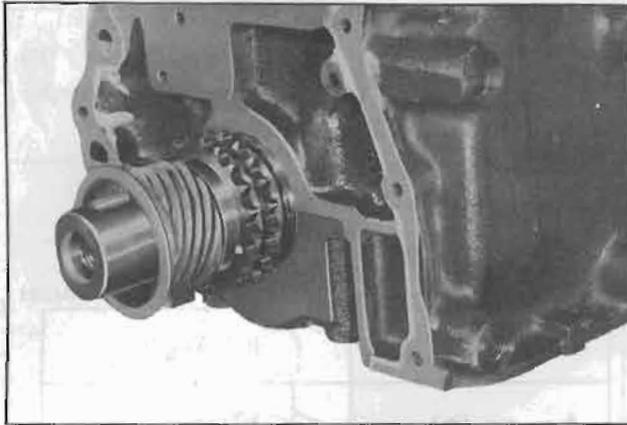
Crankshaft sprocket and distributor drive gear
